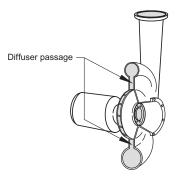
Schematic illustrating a single-stage compressor consisting of a single impeller and diffuser
